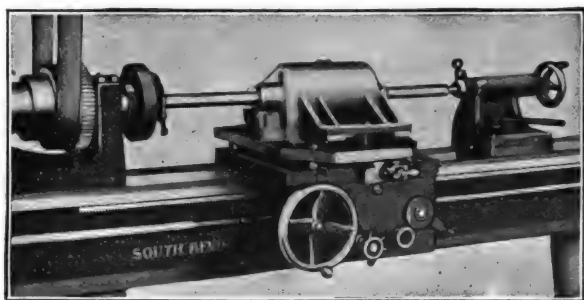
How work to be bored out is mounted on the lathe carriage.
